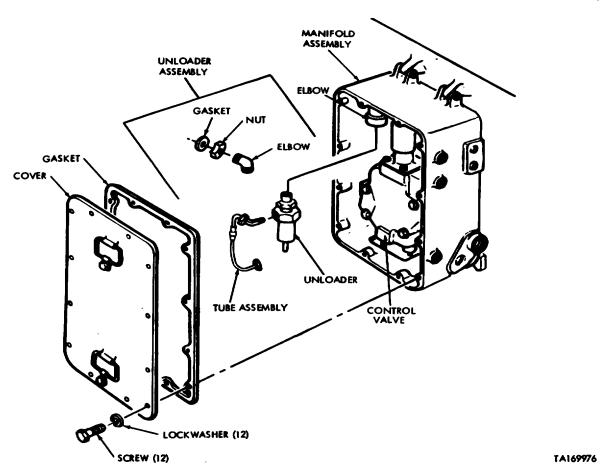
Removal, disassembly, assembly or installation of manifold unloader assembly.
